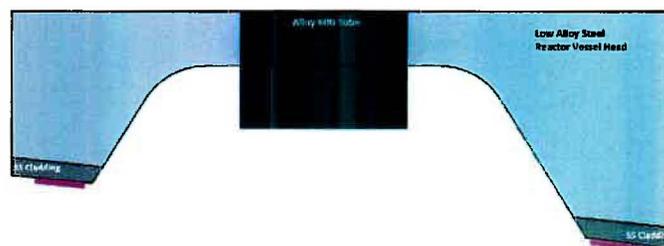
Stainless Steel Buffer beads installed on Clad surface.
